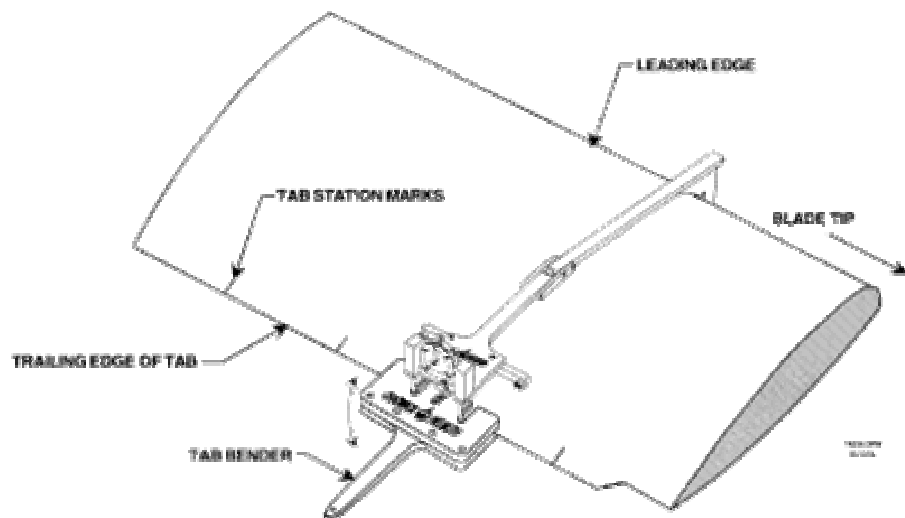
Tab bending tool [www.chadwick-helmuth.com]
